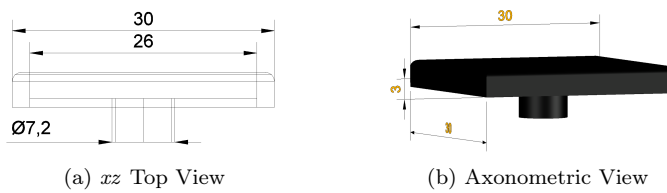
Rubber stopper for aluminum profiles ends. Dimensions are in mm.
